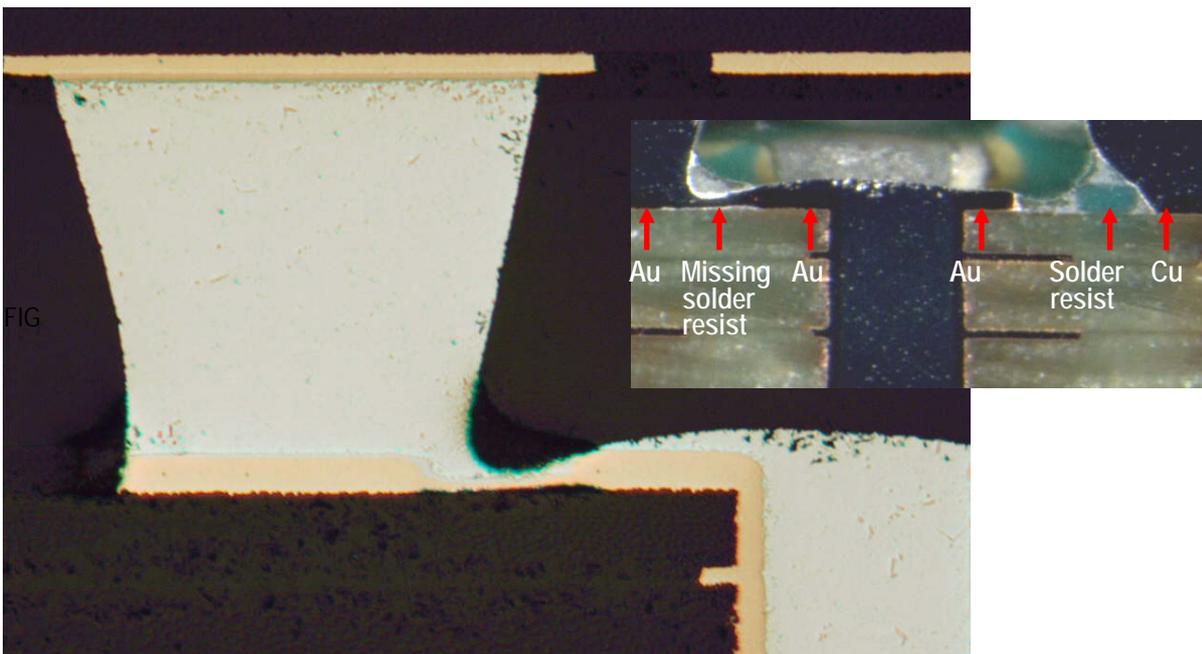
Optical view of a device cross section at the position pinpointed by X-ray examination. Notice the via acting as a solder 'thief', caused by missing solder resist.
